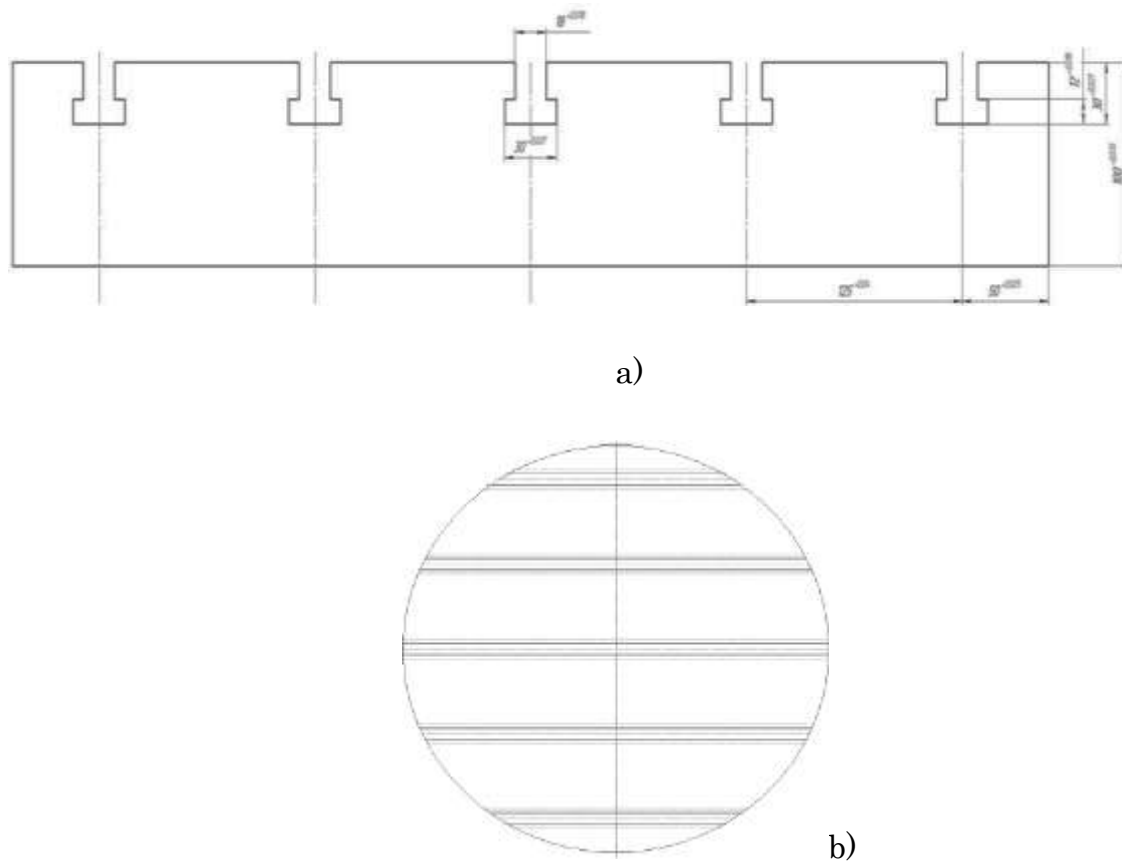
PV 1600 2-2P machine table. a) side view, b) top view
